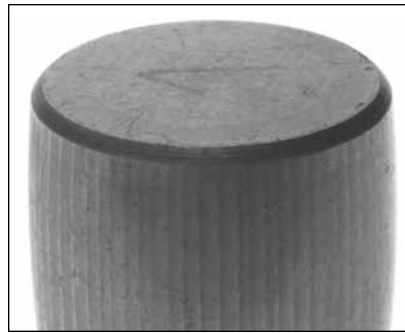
Welding on a machine, while the bearings were rotating, caused electric arc fluting on this spherical roller bearing.
